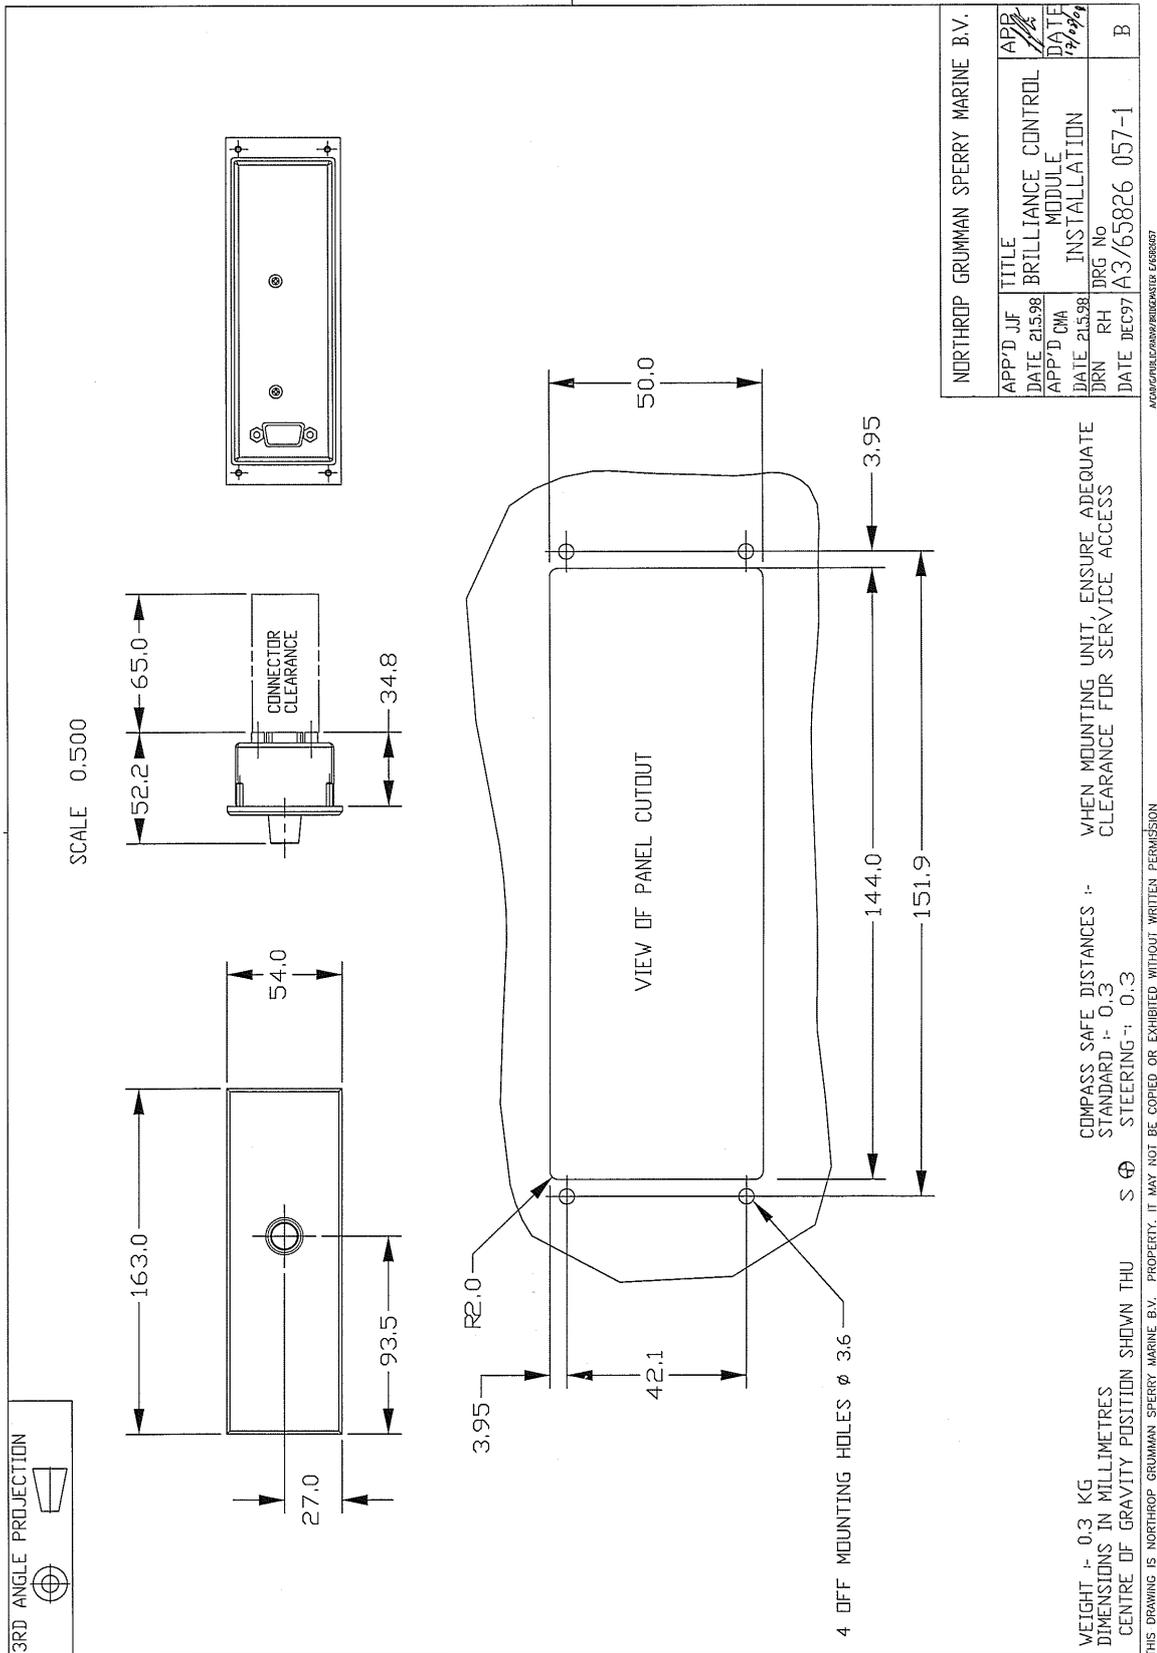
Brilliance Control Module Outline Drawing (163mm version)
